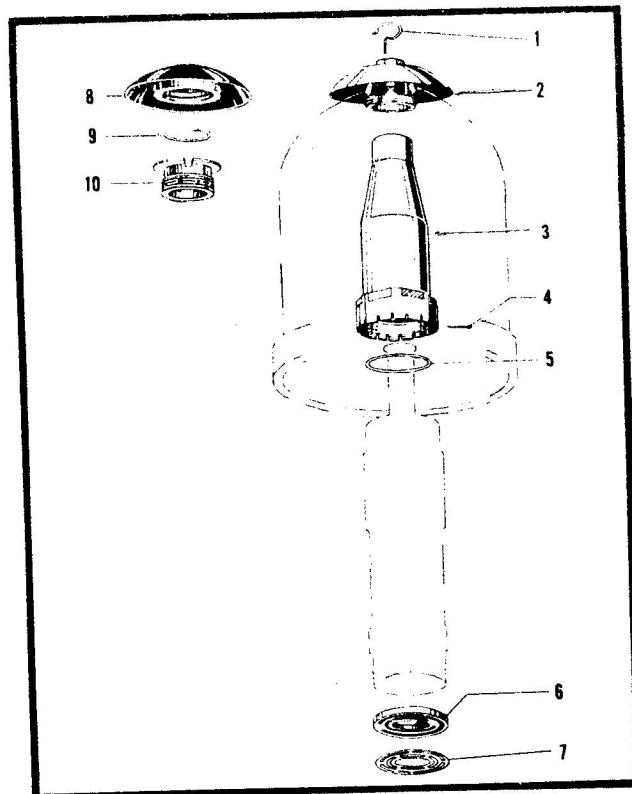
Adjustable Nozzle Type De-icing Device Assembly for Model 23E50
